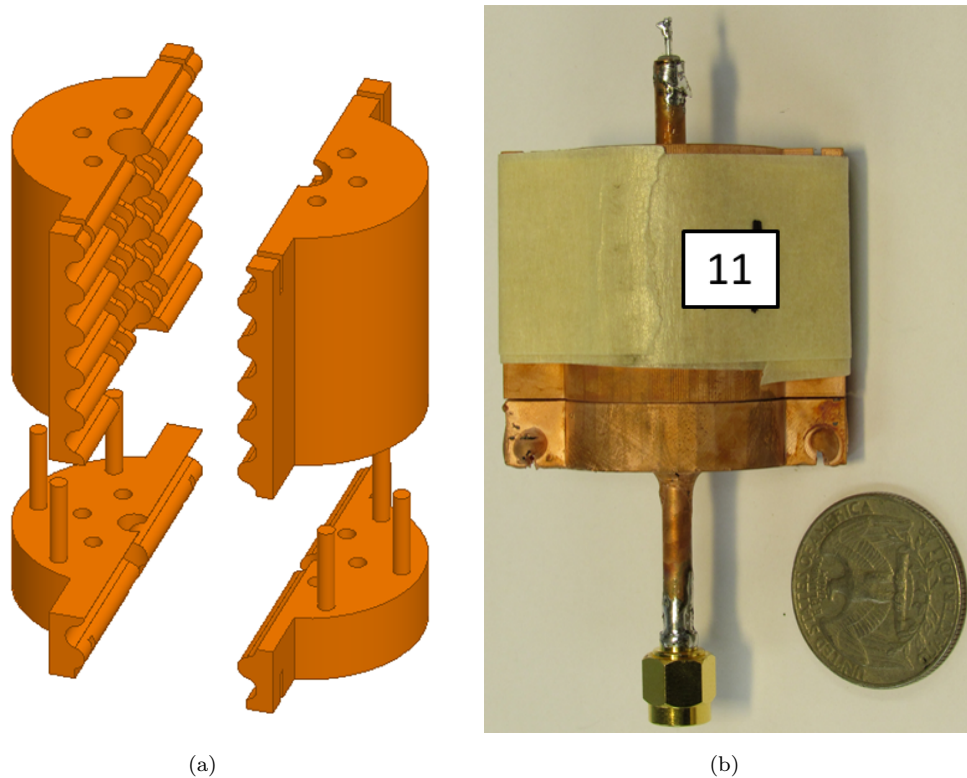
An exploded model showing the individual parts of a segmented, double folded balun (a) and a final, assembled segmented double folded balun (b) with a standard American 25¢ coin for reference.
